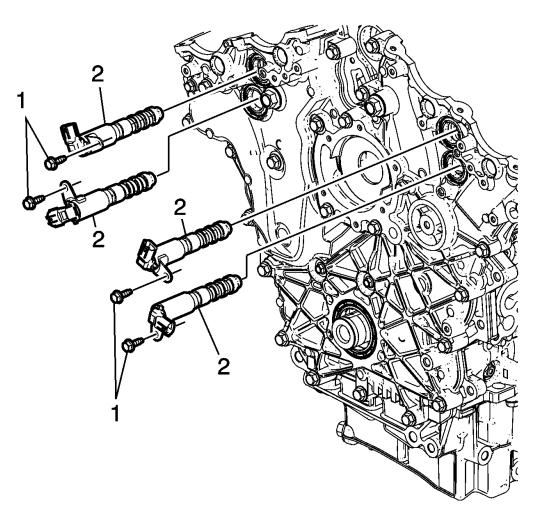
Placing Camshaft Position Actuator Valves Courtesy of GENERAL MOTORS COMPANY
